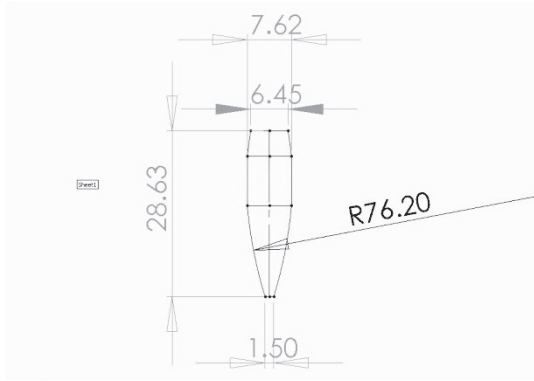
Dimensions of a 7.62 x 51 mm NATO Ball M80 bullet (Gander & Cutshaw, 2000).
